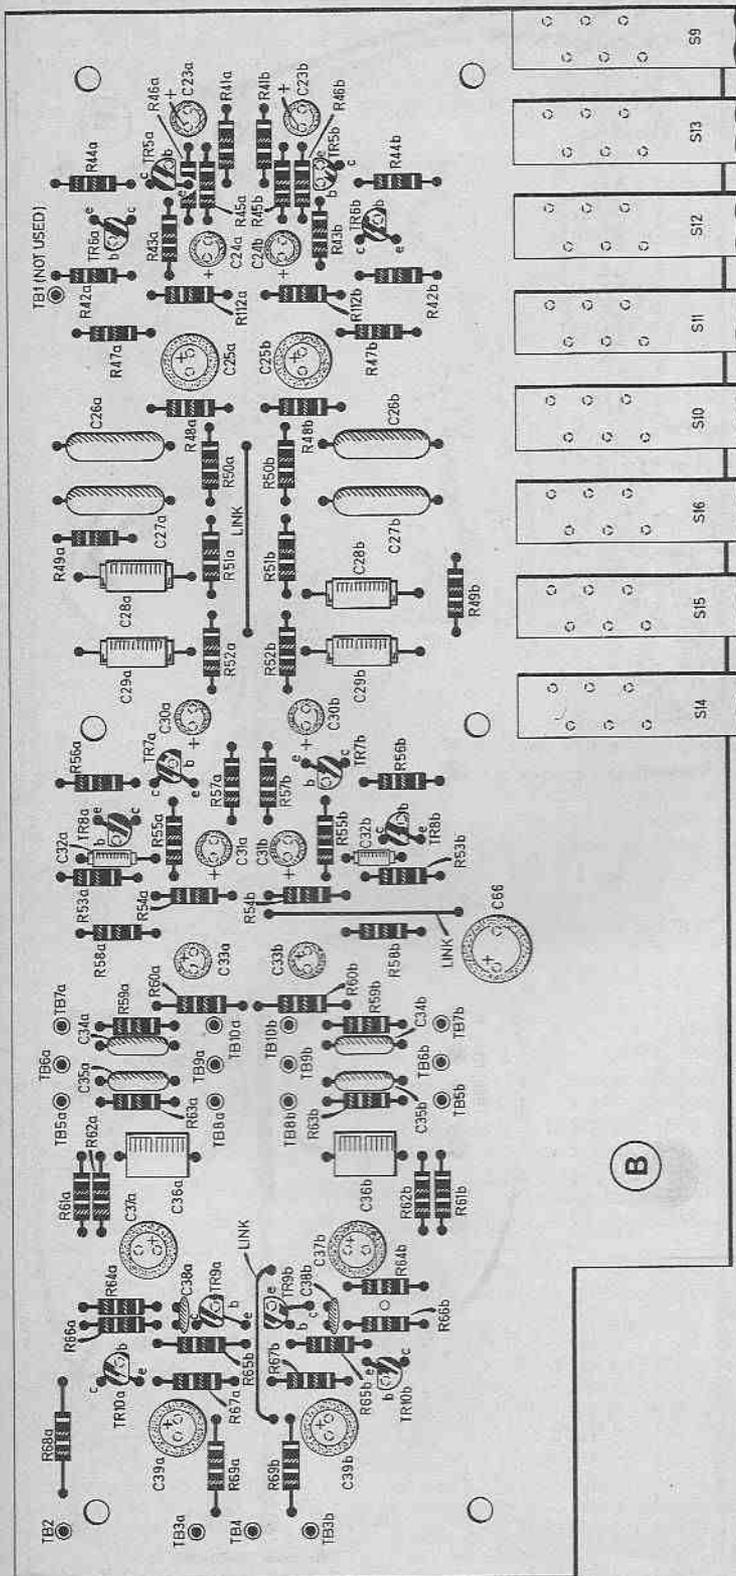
Board B of the 2020 Tuner Amplifier: top view showing components in position.
